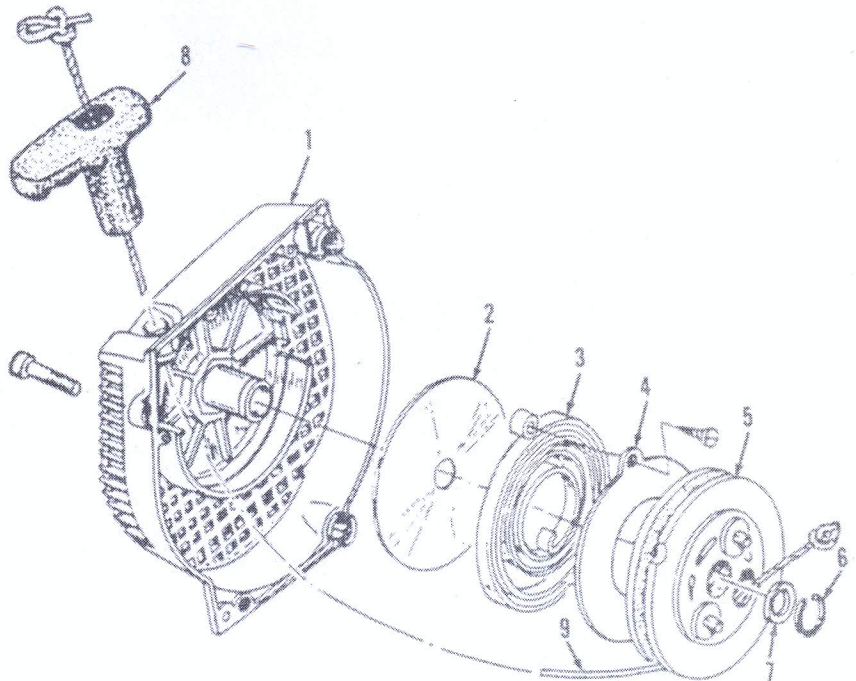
Exploded view of the rewind starter typical of models 115 and 120.
